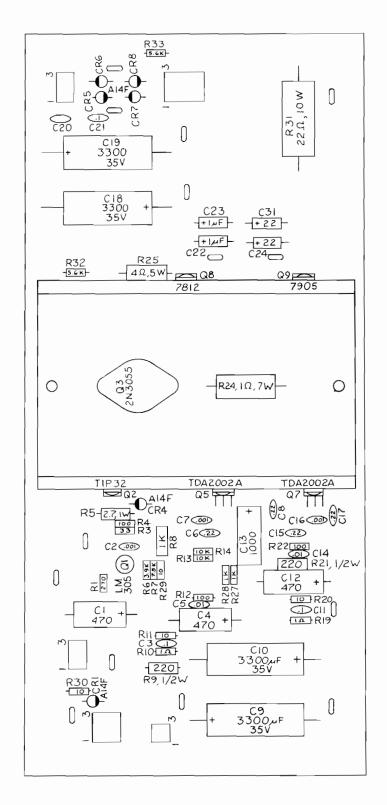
Regulator/Audio II PCB Assembly A035435-02 D
